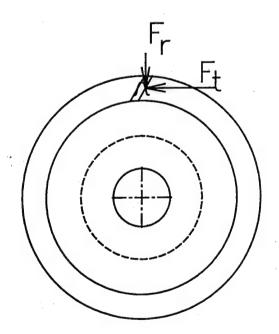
SPIRAL—BEVEL GEAR—MESH FORCES
